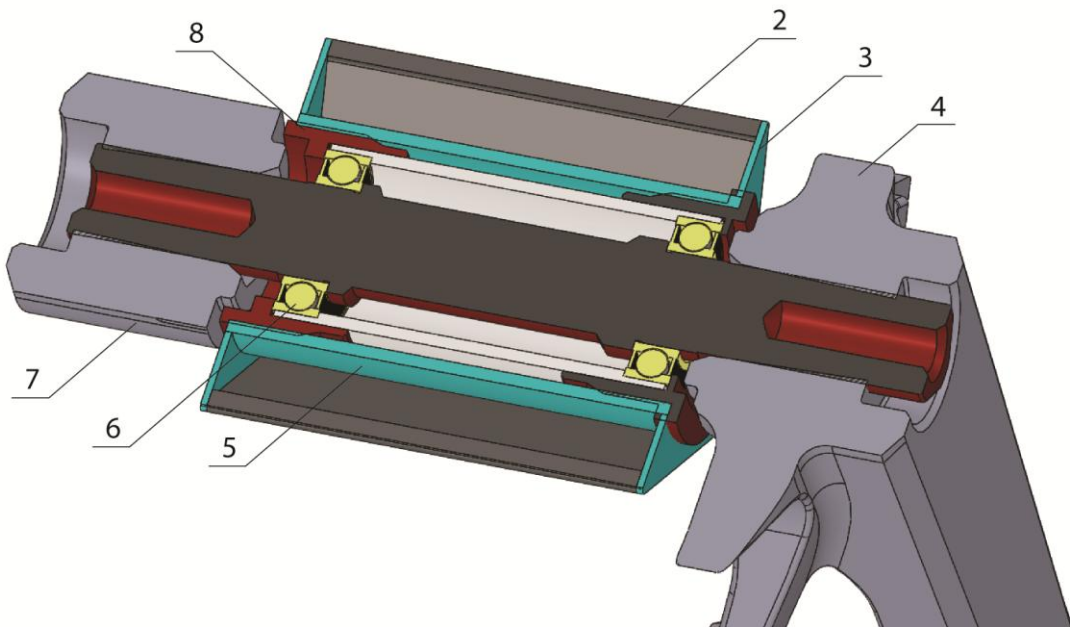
Bottom bracket, crankset and bicycle frame section view. 2 - rectangular frame tube; 3 - laser cut aluminum sheet to integrate bottom bracket shell; 4 - right crank arm; 5 - bottom bracket shell integrated into the rectangular tube; 6 - ball bearings inside the bottom bracket; 7 - left crankarm; 8 - bottom bracket cartridge
